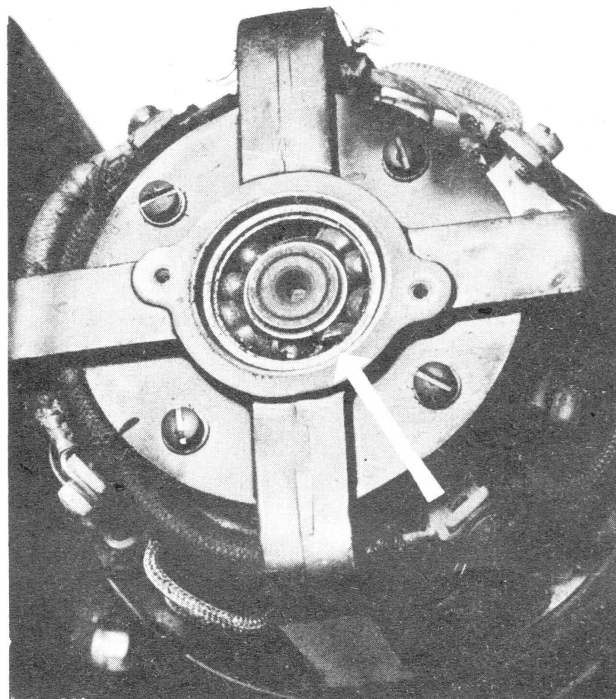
800-1-C motor-alternator ball bearing at commutator end
